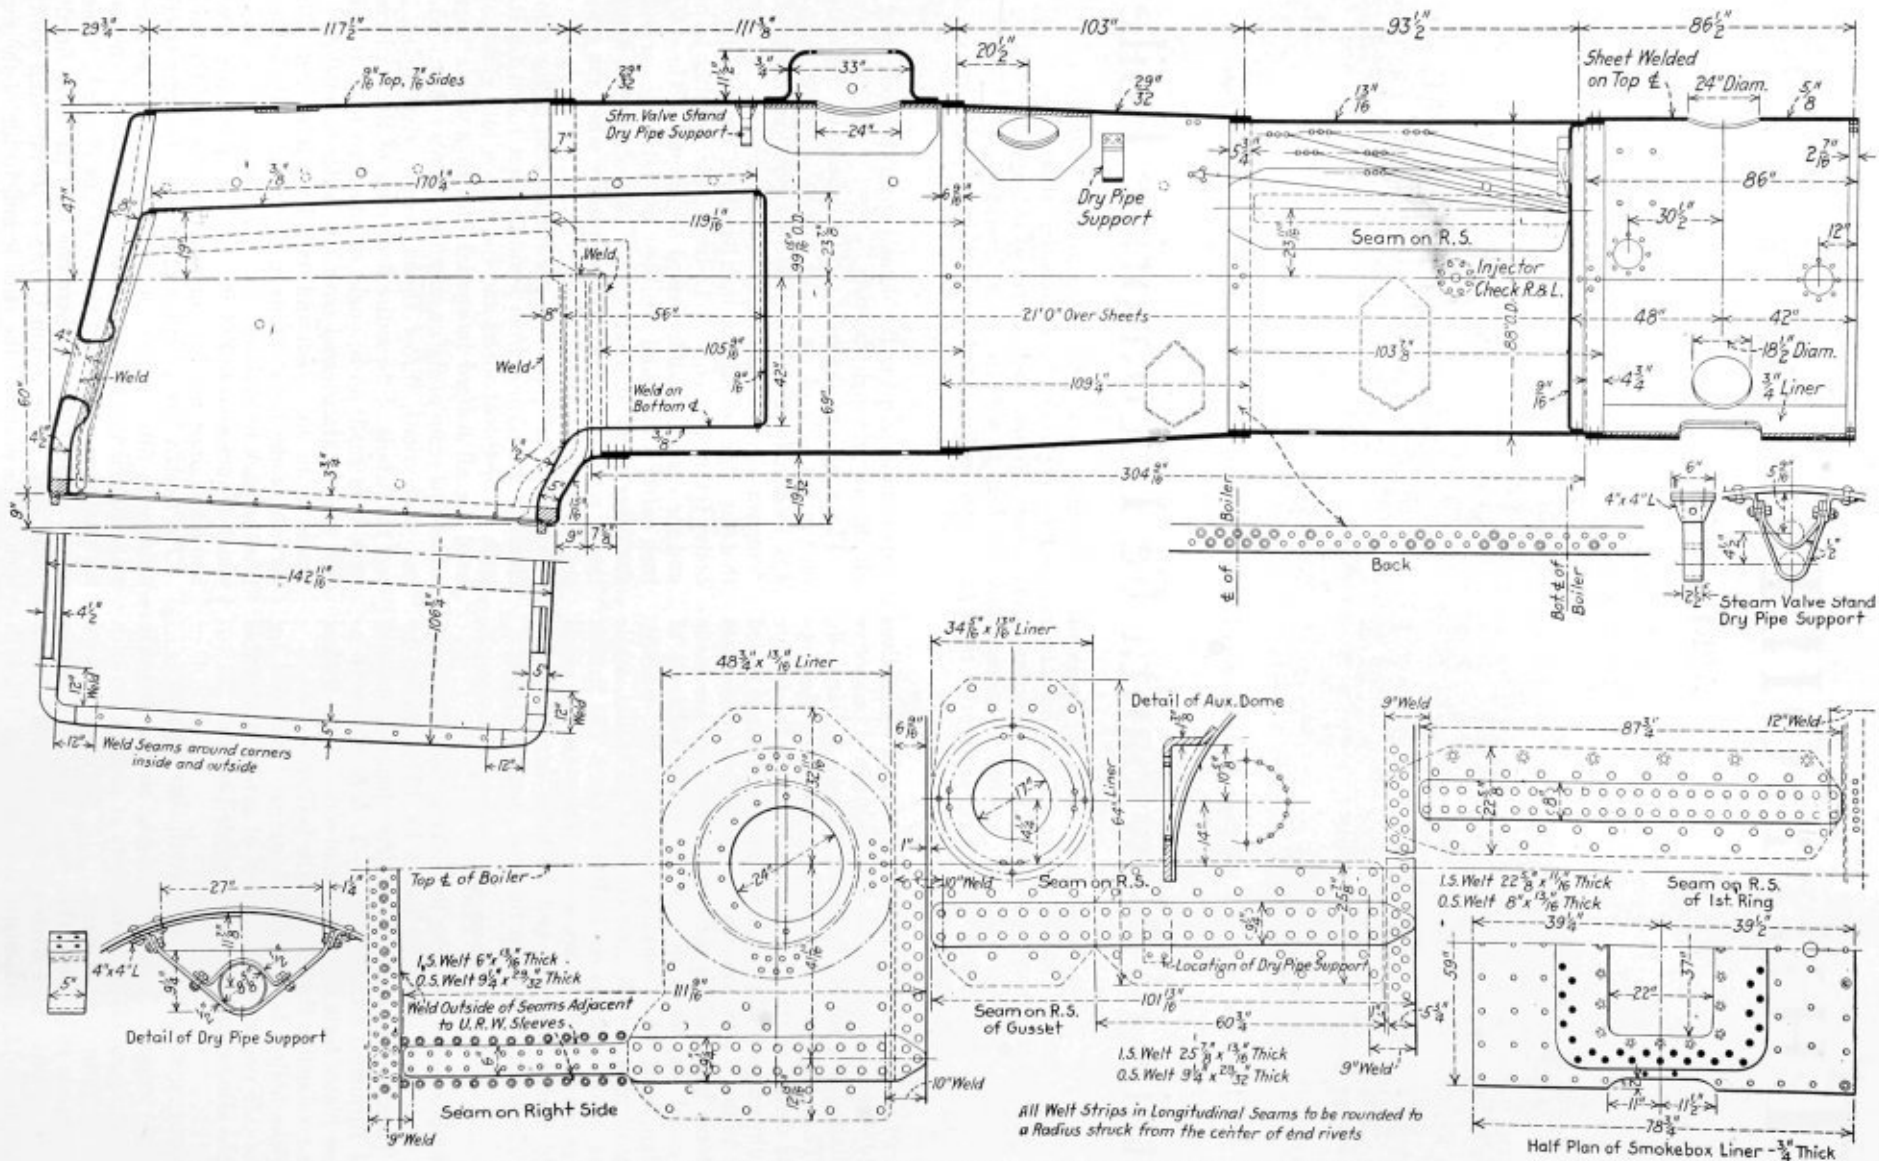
Details of Santa Fe Locomotive Boiler with the Arrangement of the Longitudinal Riveted Seams
